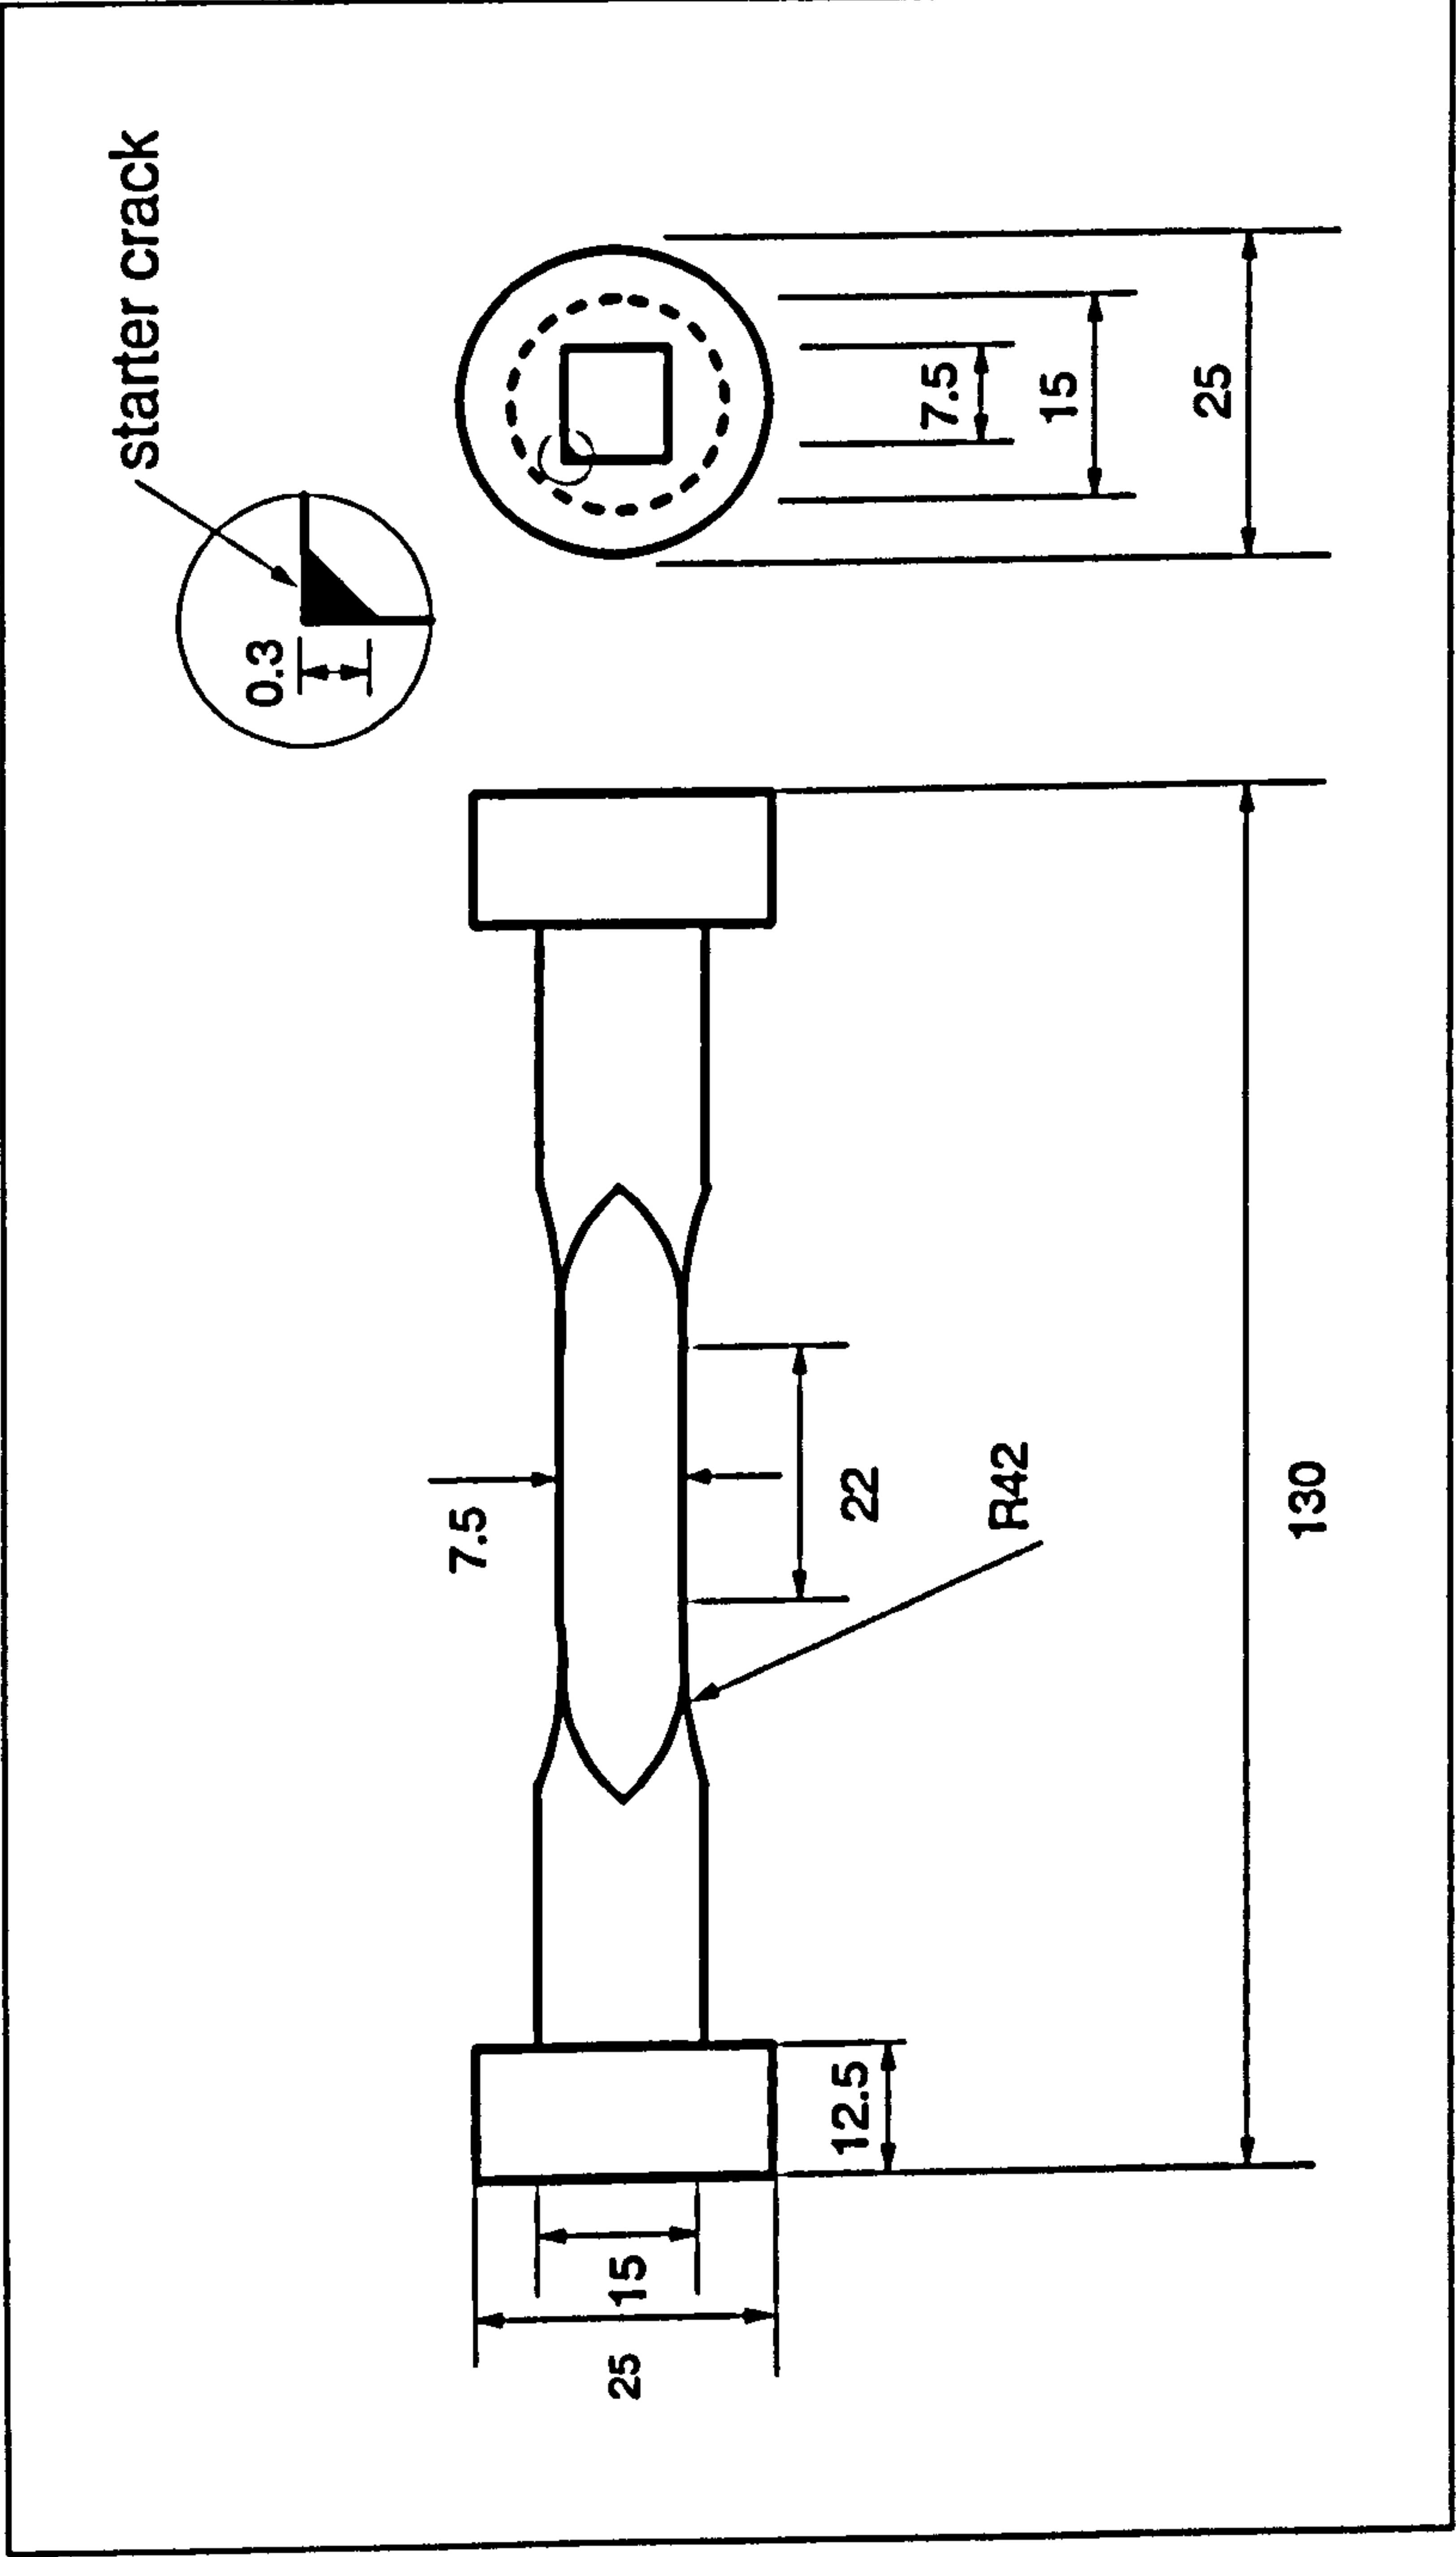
Corner Crack Specimen Geometry (dimensions in mm)
